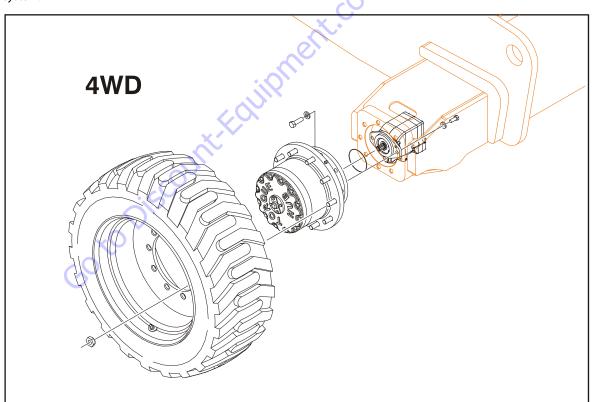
Drive Hub Installation - 4WD (Prior to SN 0300083331)
